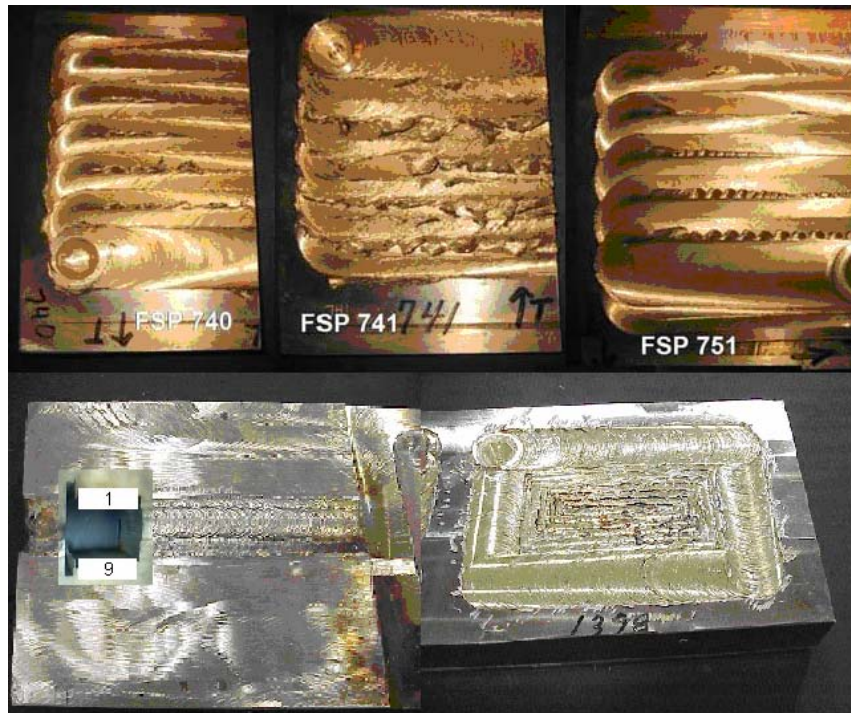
FSP and Fusion Weld NAB Material, with example of sectioning of miniature tensile specimen. The thickness of the fusion weld plate and 1398 FSP plate was 1.5 inches, while the 740, 741 and 751 FSP plates had a thickness of 0.3 inches.
